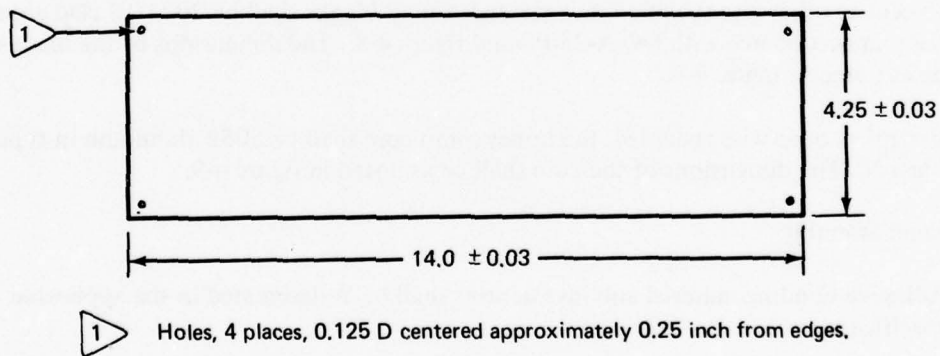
Metal-to-Metal Peel Test Panel Blank
